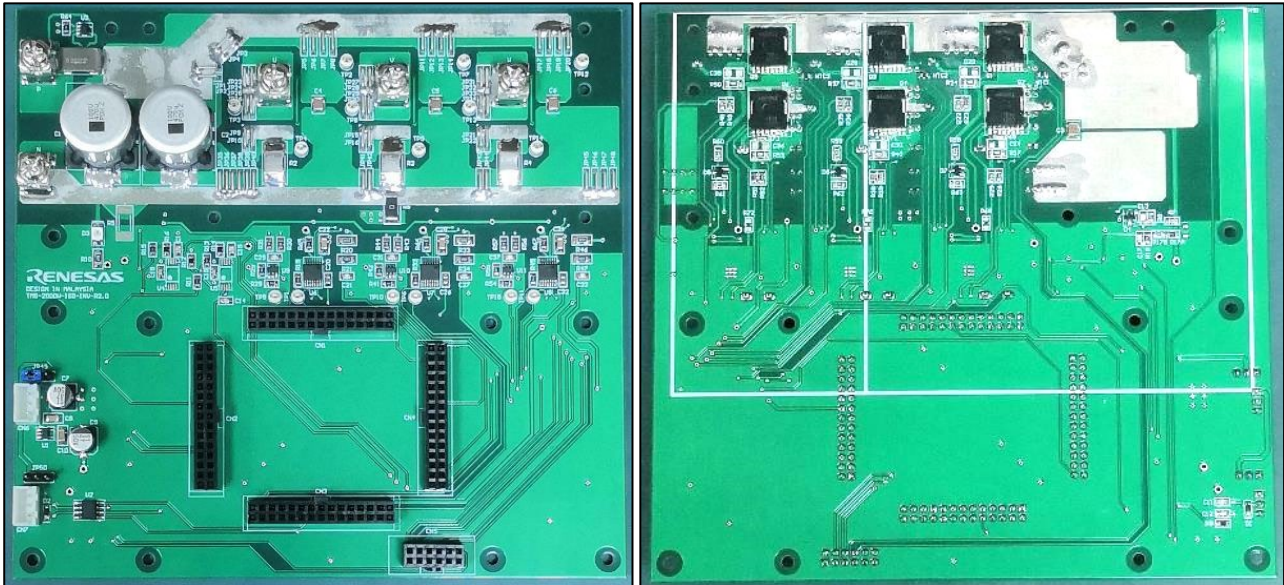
Power board: Top view (Left) and Bottom view (Right)
